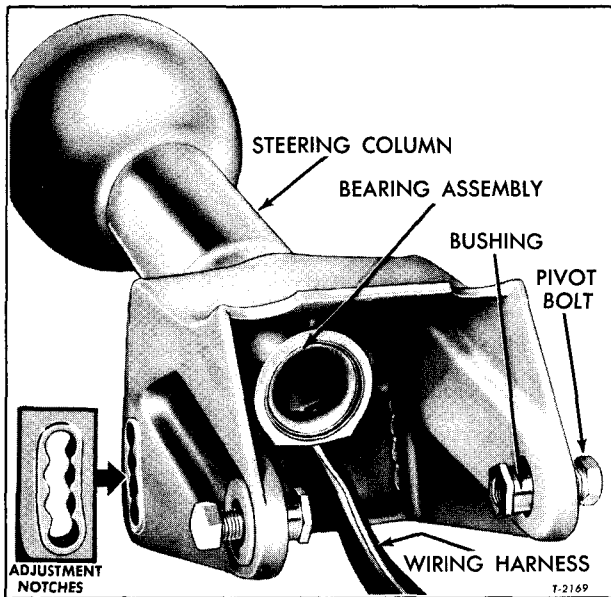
Steering Column Upper Shaft Lower Bearing (Conventional Cab Models) (Typical)
